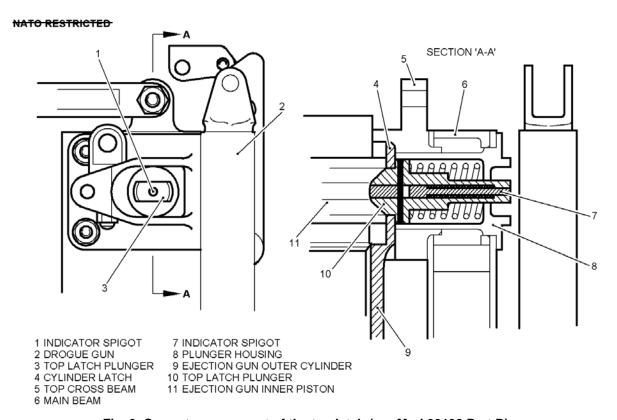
Correct engagement of the top latch (pre Mod.02198 Part B)
